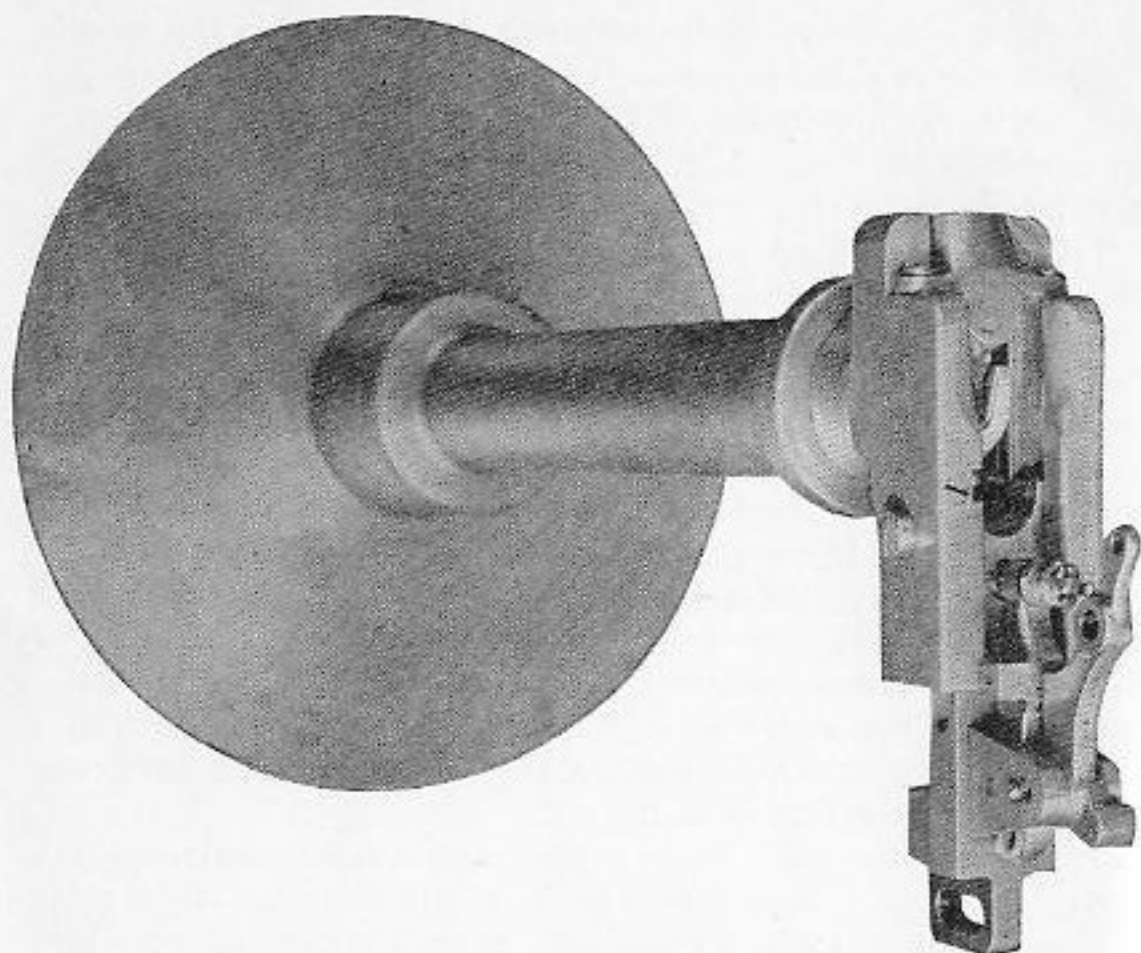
A FIRING LOCK MOUNTED ON END OF MUSHROOM STEM.
